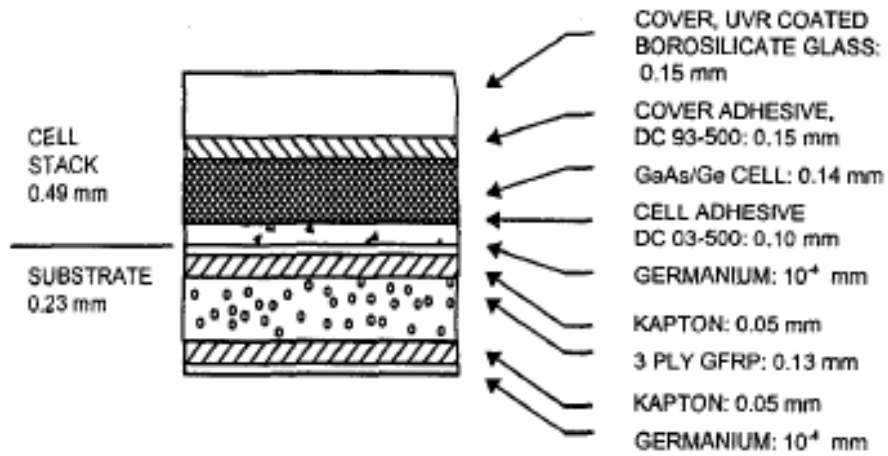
Cross-sectional view of a typical blanket assembly [14].
